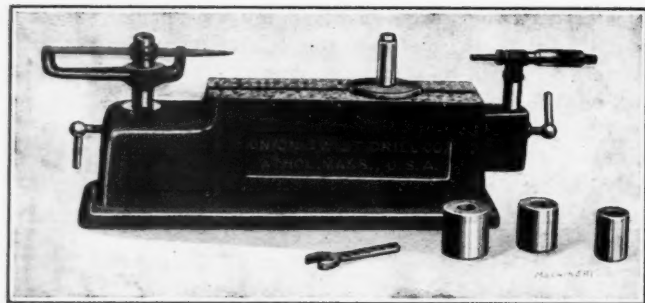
Fixture for testing Concentricity of Periphery and Bore of Milling Cutters and Position of Face of Cutter Teeth of the Radial Type
